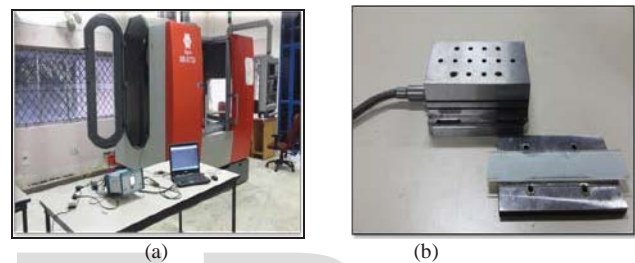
(a) Vertical milling machine integrated with Kistler dynamometer amplifier and PC based dynamometer readout using Dynoware software (b) Dynamometer along with workpiece glued on a stainless steel plate.
